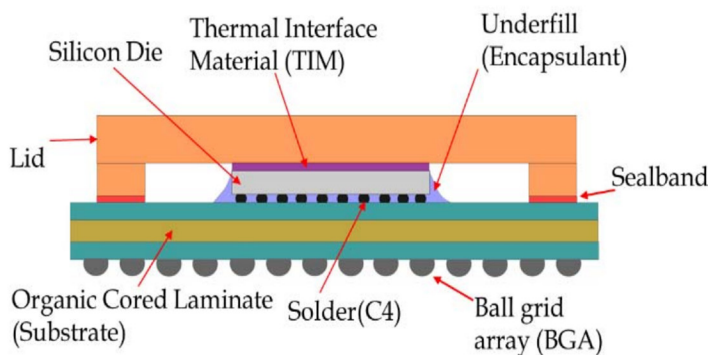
A Typical Early Juniper ASIC in Flip-chip Package Assembly.
